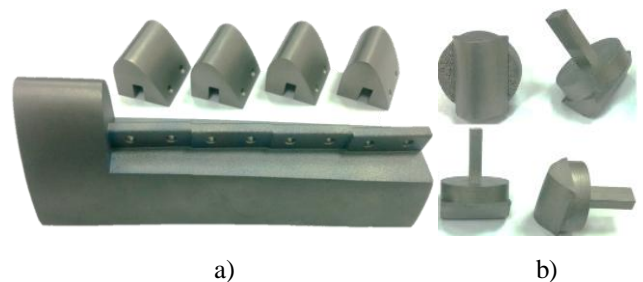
Parts (a) and special samples for erosion tests (b) fabricated by 3D printing
